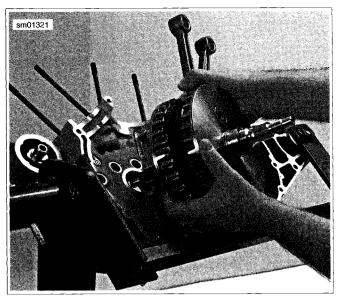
Installing Flywheel Assembly In Right Crankcase
